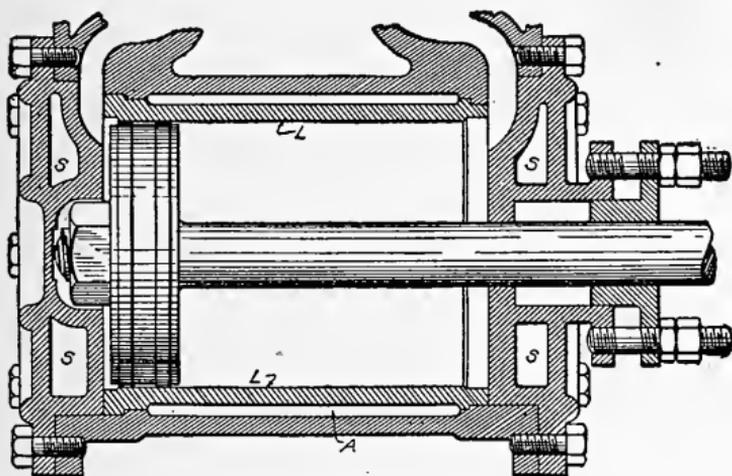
Section of Steam Engine Cylinder, Showing Method of Jacketing
